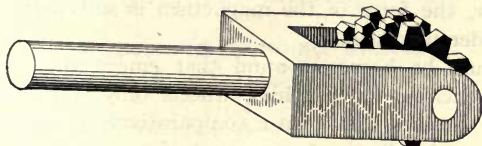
Grinding-wheel dressers mounted in a special holder for truing wheels used on cylindrical grinding machines.
